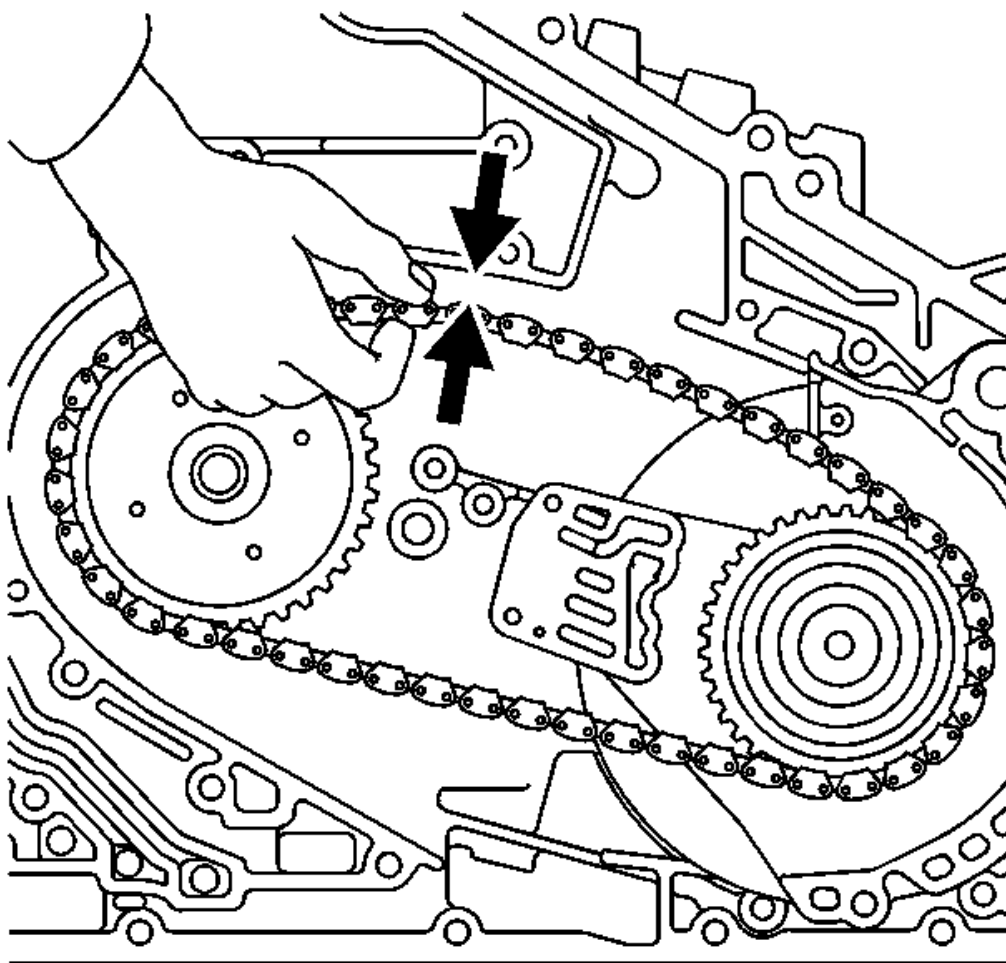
Measuring Drive Chain To Case Rib Clearance
